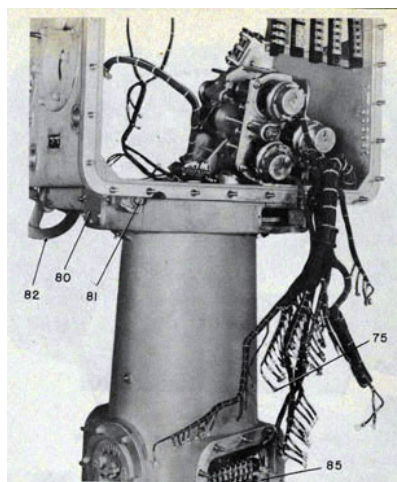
Removal of Locating Pin and Handwheel Shaft.
